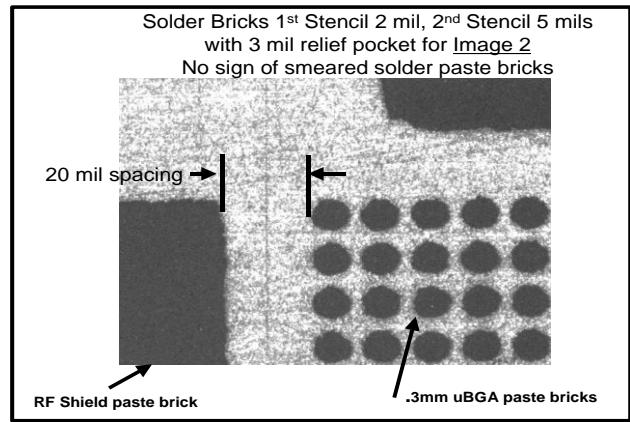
0.3mm uBGA solder bricks with 20 mil spacing
